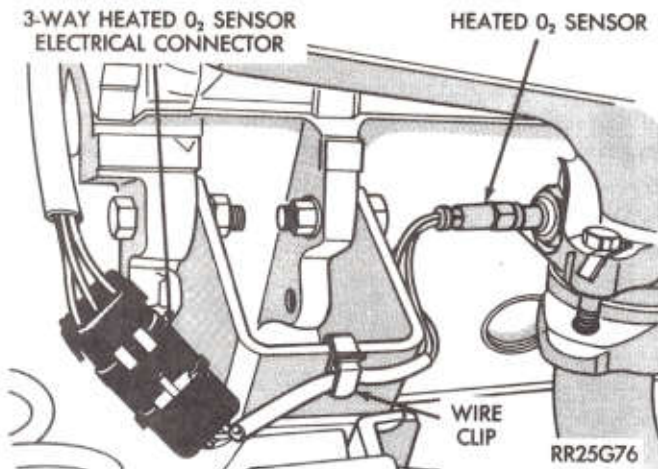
Heated Oxygen Sensor Electrical Connection 5.2L Engine
